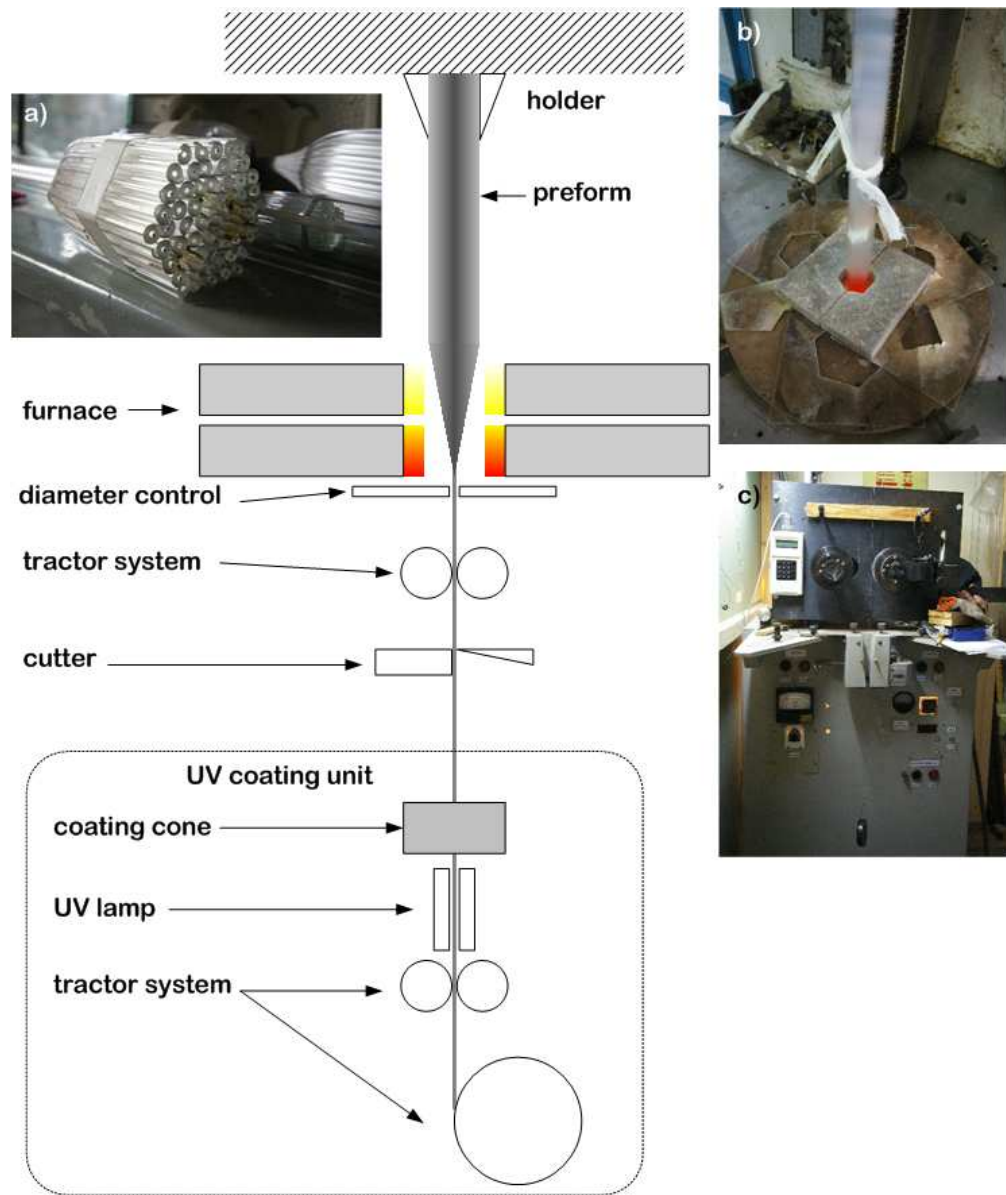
Schematic diagram of the fiber fabrication process. (The assembly of the preform is not shown.) (a) A photograph of a PCF preform as used in the drawing process. (b) The preform fed into the furnace. (c) The diameter control and cutting unit.
